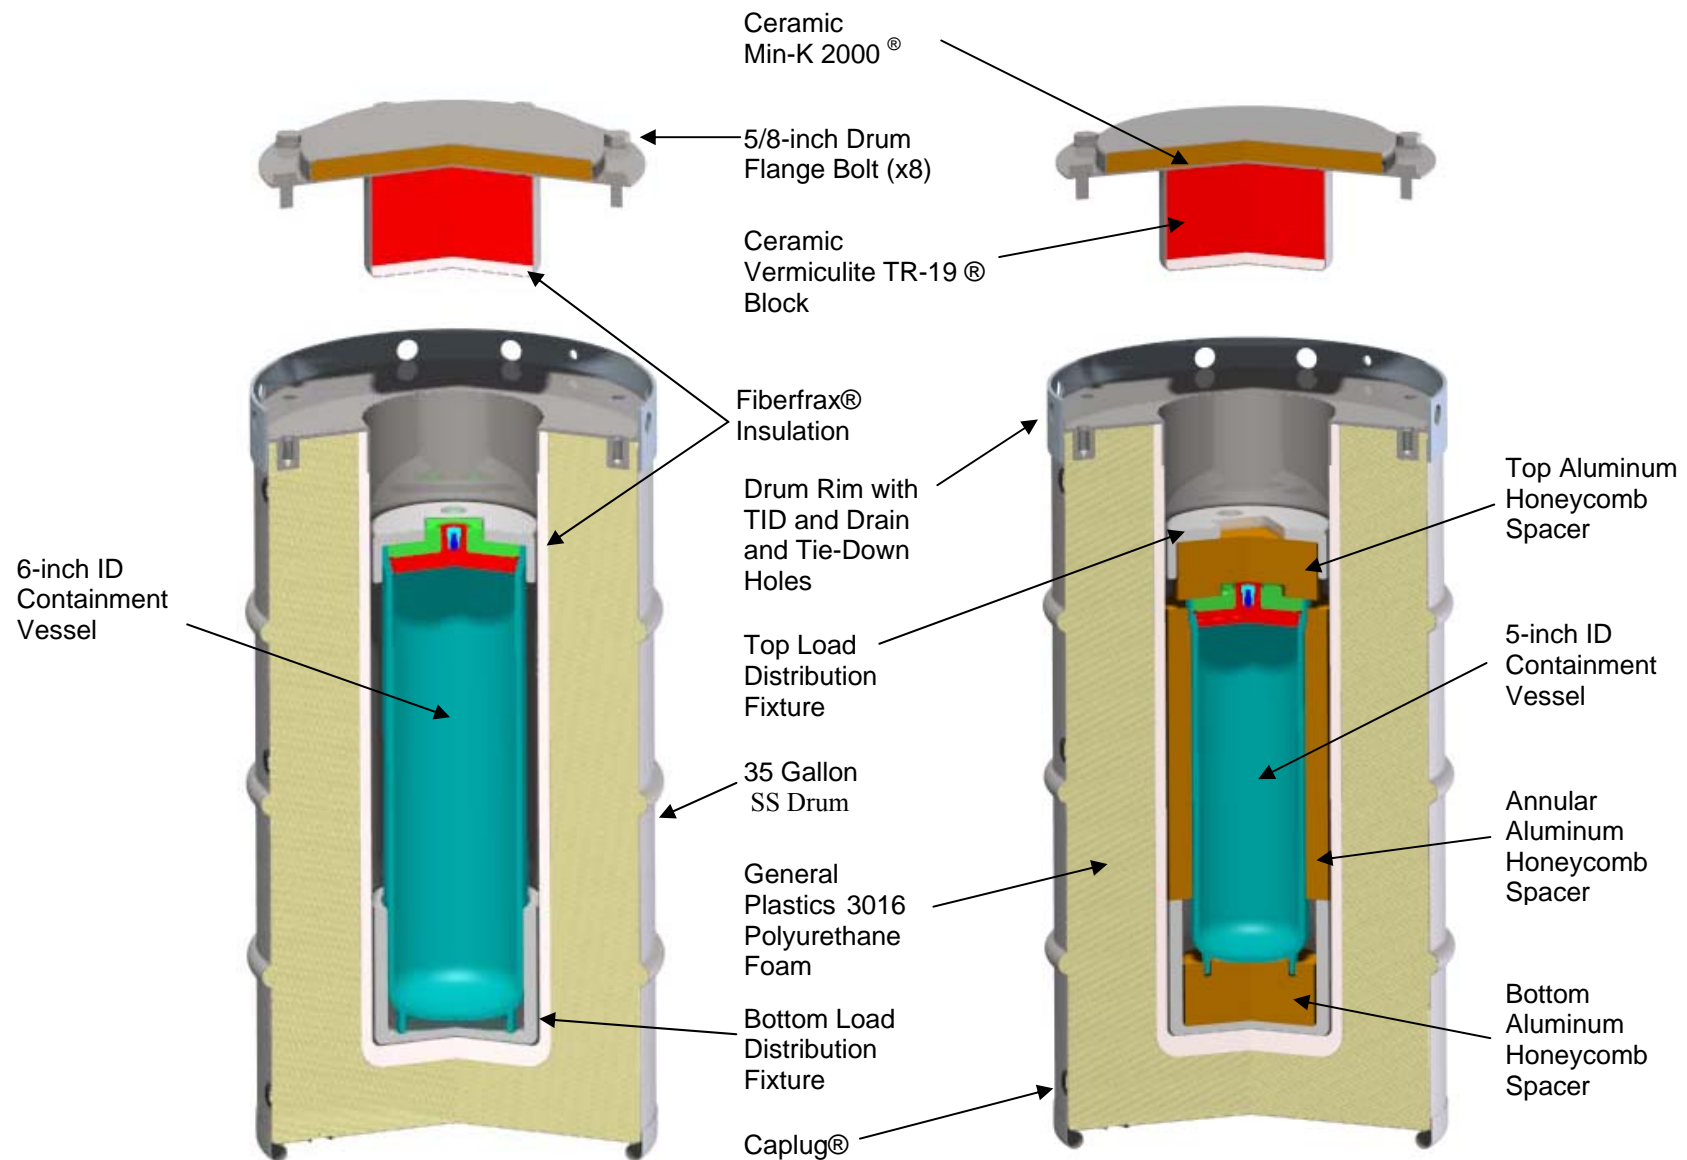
3-Dimensional Cut Away Illustration of the 9977 with a 5-inch and 6-inch Diameter Containment Vessels
